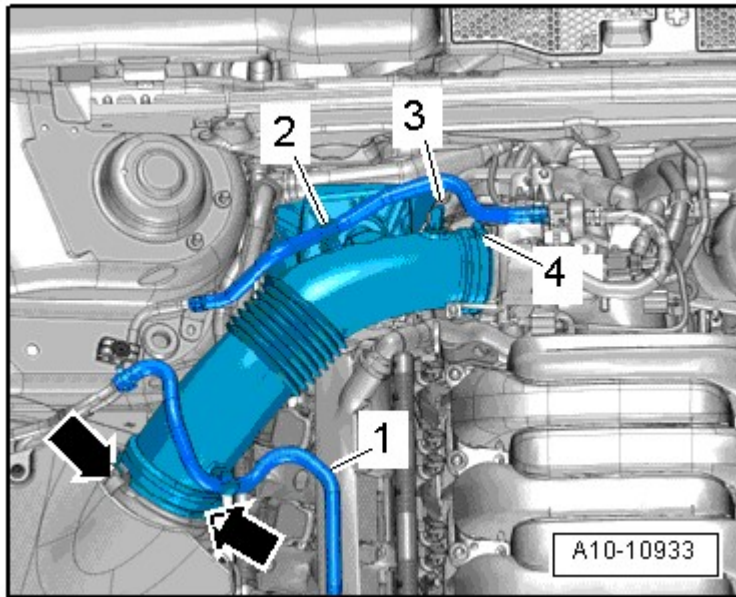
Removing Air Guide Pipe By Loosening Hose Clamp -4- & Opening Clips -Arrows-
